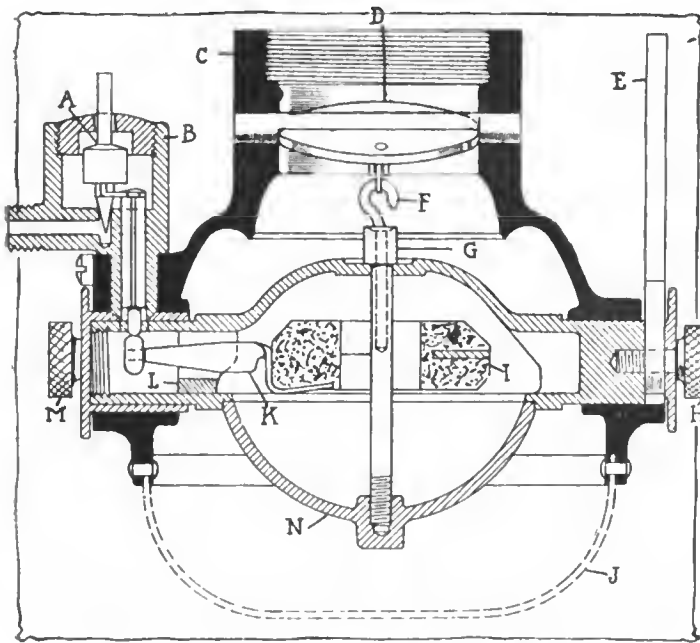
A B C carburetor contains six jets in rotating float-chamber
